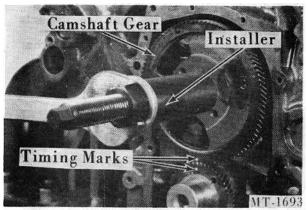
Installation of Camshaft Gear Using SE-1900 Installer
